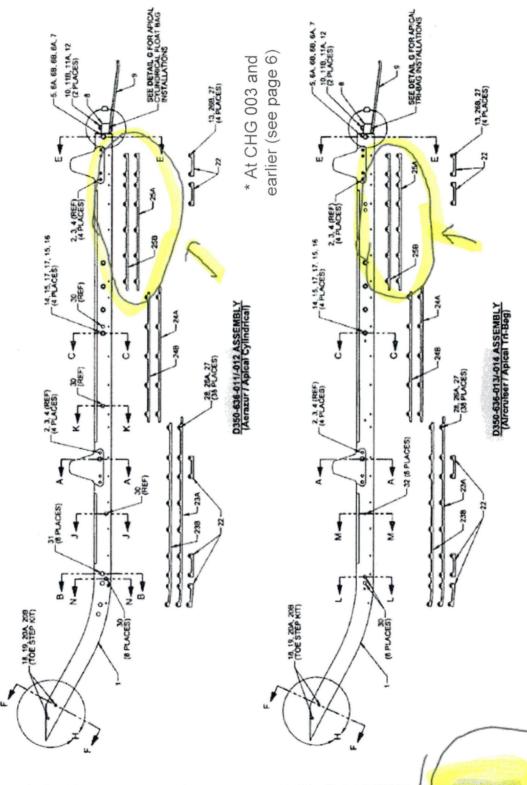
D350-636-011/-012/-013/-014 SKIDTUBE ASSEMBLY AT CHG 003
